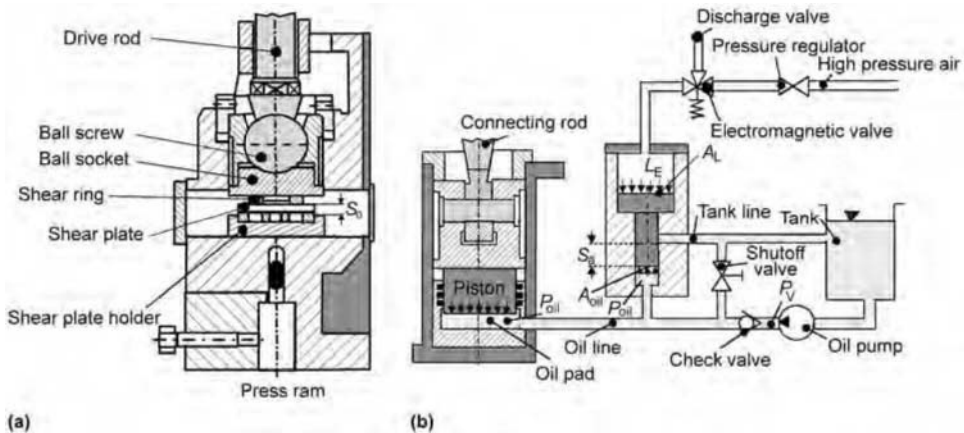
Overload protection systems: (a) mechanical (shear plate) overload protection; (b) hydraulic overload protection. Adapted from Ref 10.3.
